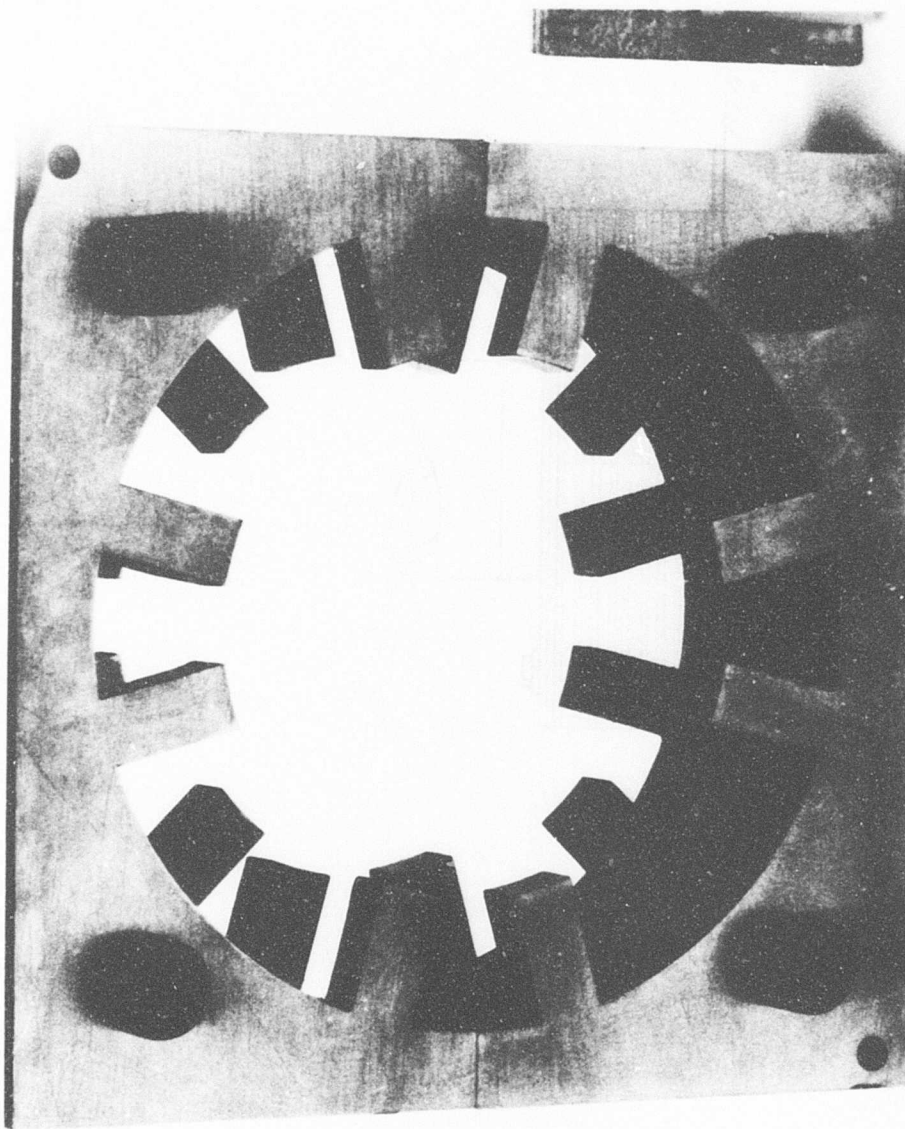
The Lamination Assembly Fabricated in Two Halves for Program.
